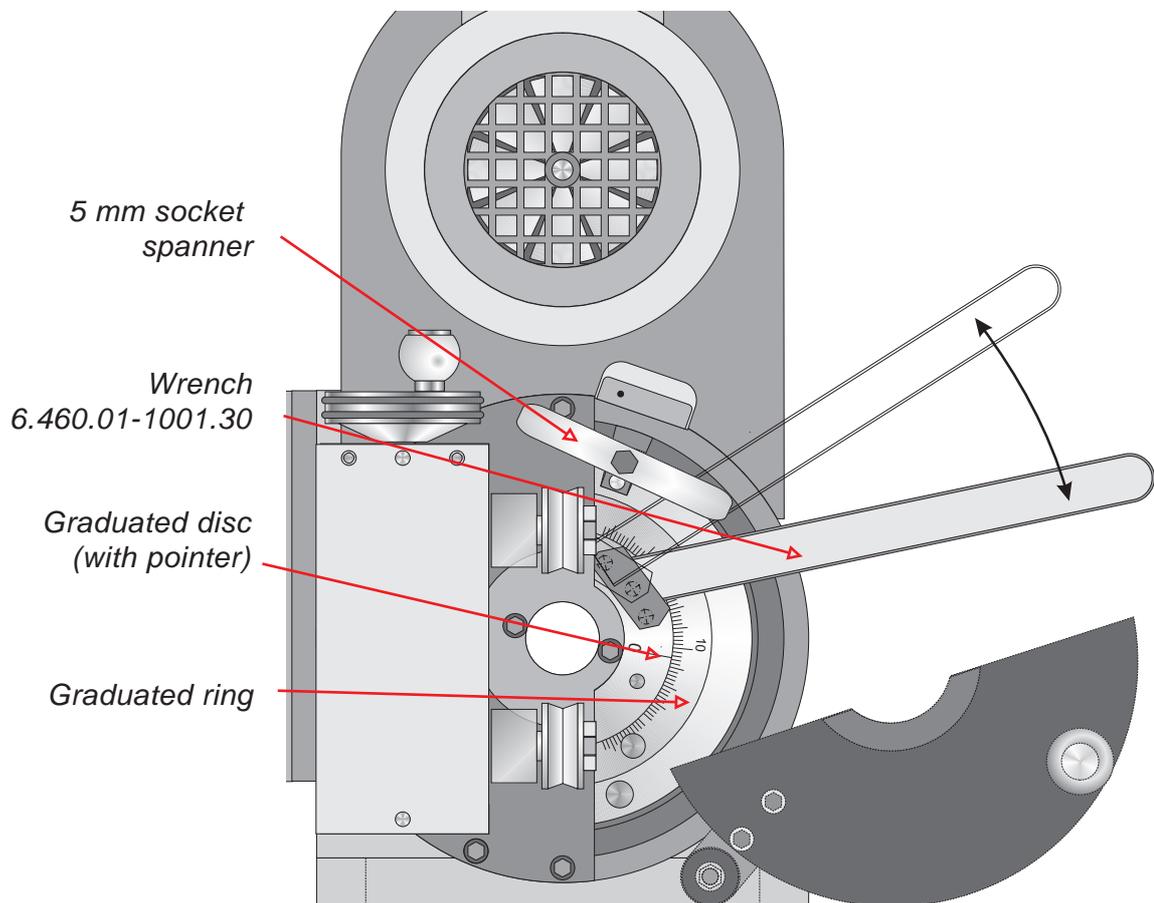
/12 Adjustment side, tools inserted for nominal dimension adjustment
